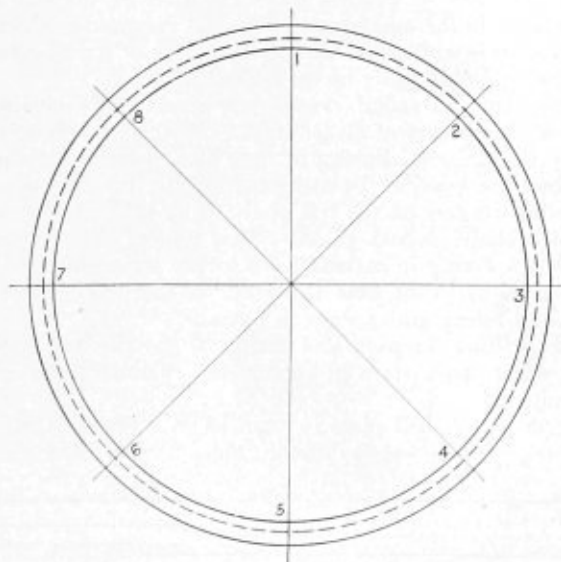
Dividing the Shell Into Small Sections to Provide Against Expansion During Welding Process
